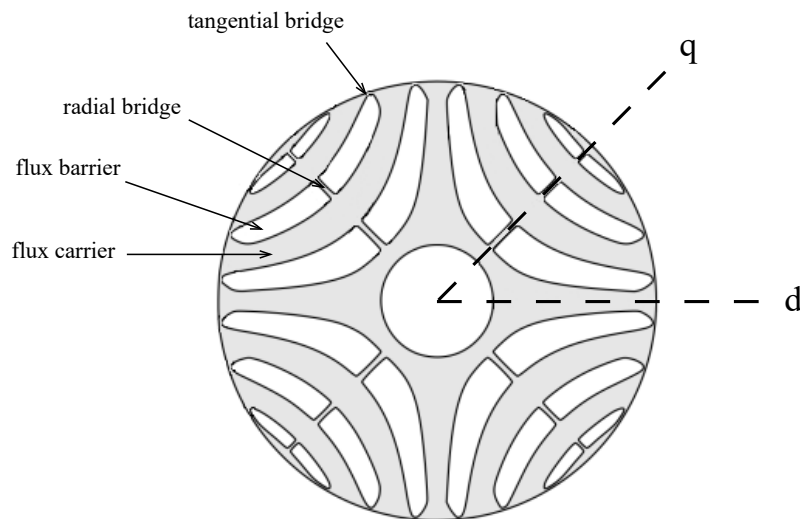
A sketch of a TLA rotor sheet [30] (edited).
